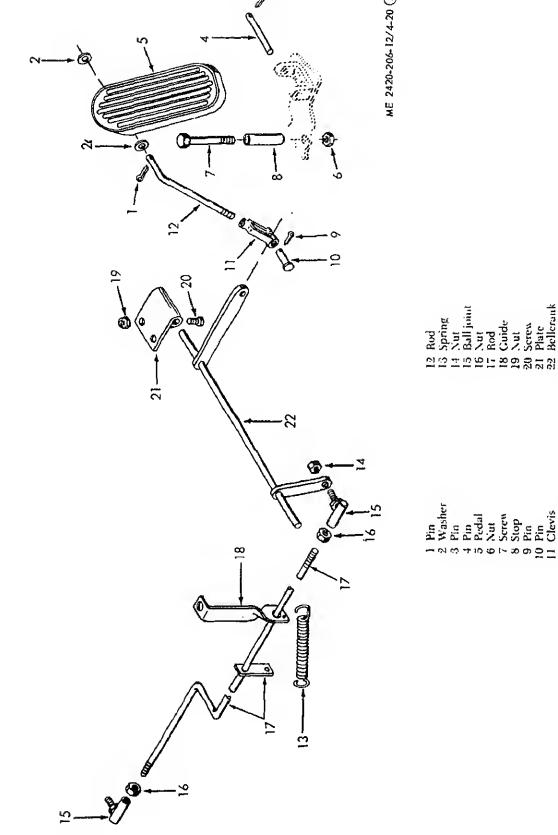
Accelerator pedal and linkage, removal, disassembly, reassembly, and installation (sheet 2 of 2).
